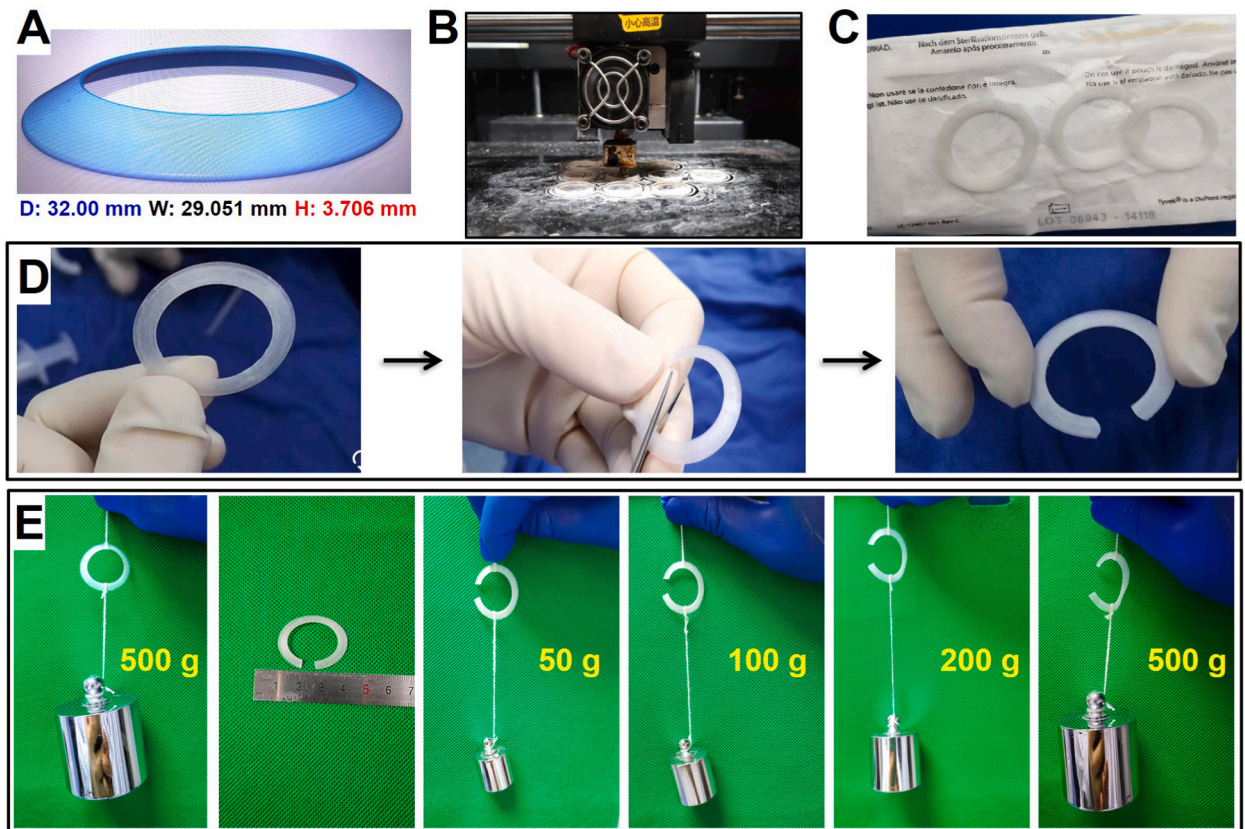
Design, fabrication and mechanical properties of 3D-printed amniotic fornical ring (AFR). (A) Computer design drawing. (B) Printing process. (C) Ethylene oxide-sterilized AFR. (D) Manufacturing process of the lower notch of AFR during operation. (E) Mechanical properties of AFR.
